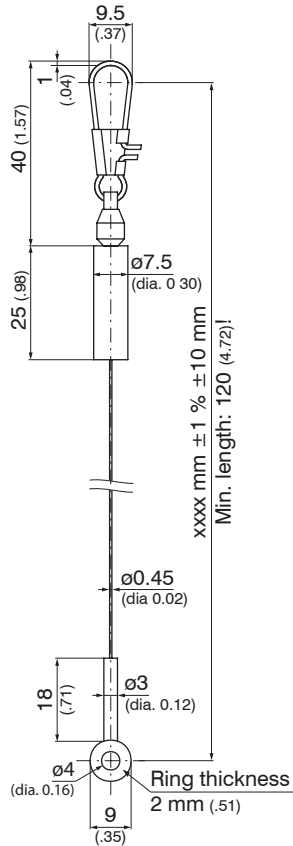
Wire extension WE-xxxx-CLIP, dimensions in mm (inches), not to scale
